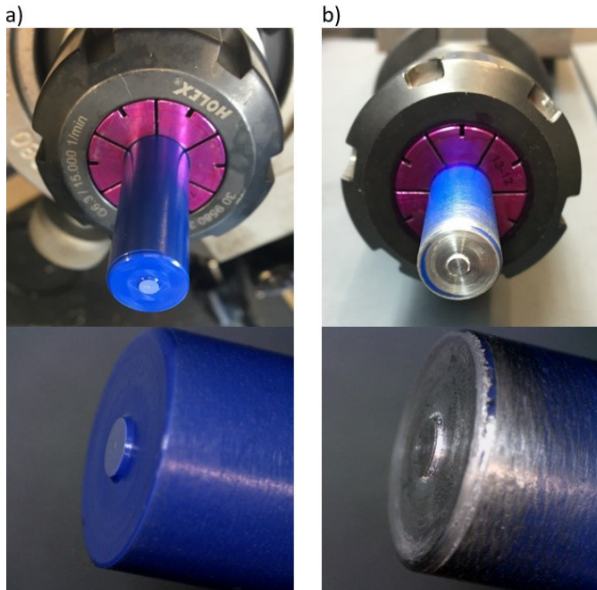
The tool used in FSW process: a) new tool; b) tool after making 2 m of FSW joints
